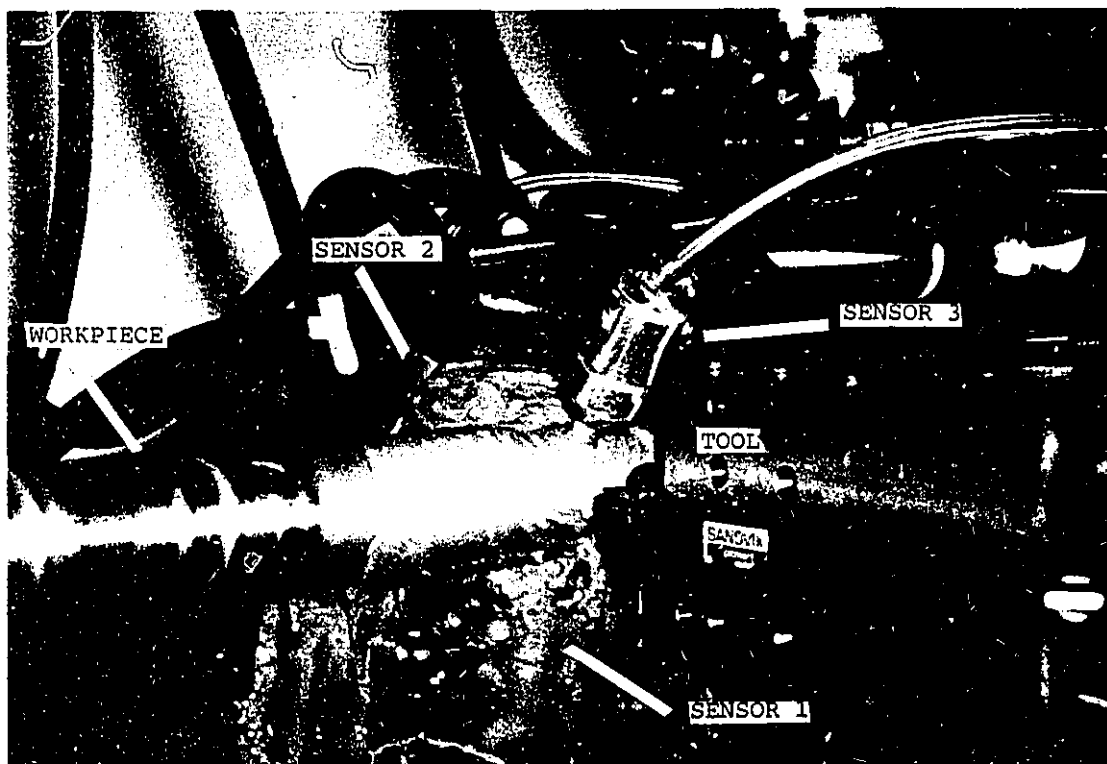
A Close-Up Photograph Showing the Tool and the Measurement System during Operation.
